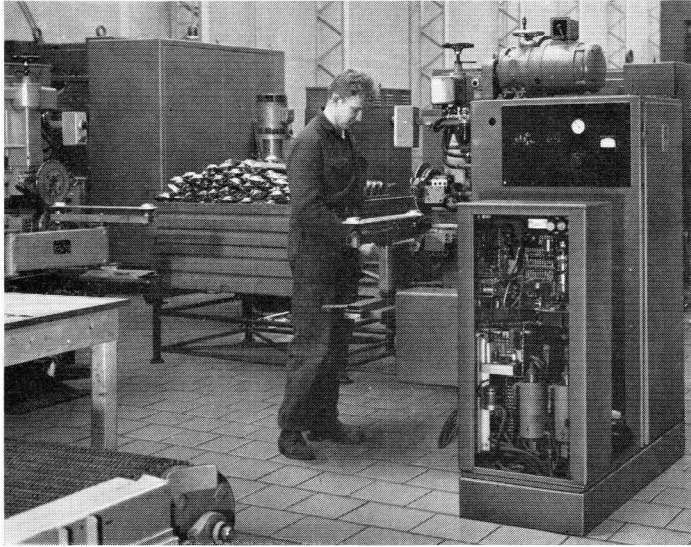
(a) Seam welding installation showing welding of stampings for central heating radiator elements.
